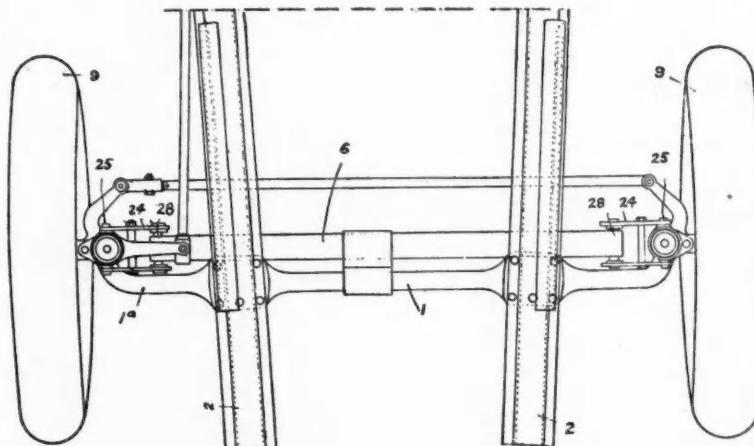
Front assembly showing in plane view slipper-type front axle.
